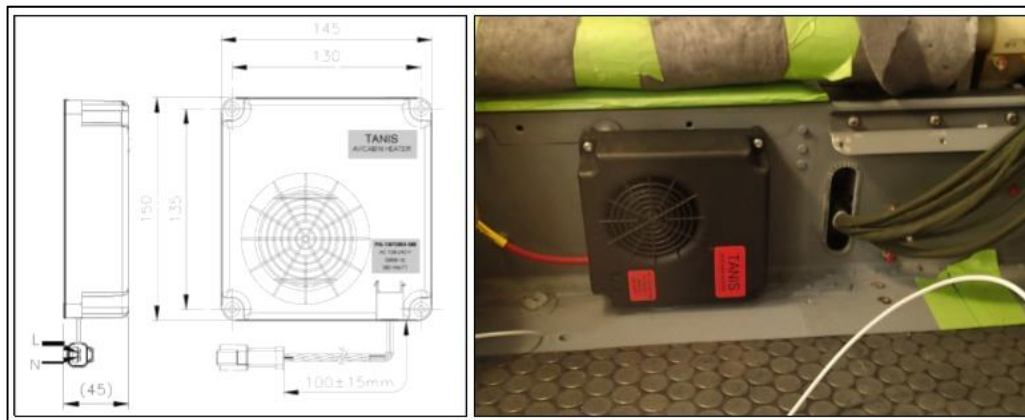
Option: DHC-6 all model instrument/cabin heat (supplied separately): Two AV/Cabin Heaters, THP3094-500 in place of or in addition to panel heat elements, TEP2970-. This option replaces crew cabin outlet circuit, refer to drawing 02973. Example above AV/Cabin Heater located in crew cabin with 4 each Click Bond studs, CB4000E3CR16 (round base) or CB4000E3CR20-750 (trimmed base). For alternates and/or supplemental information, refer to Click Bond drawing CB4000 Rev 23 or later and heater instruction TN03094. Note: Plug 2 circuit operates separate from primary preconditioning kit.
